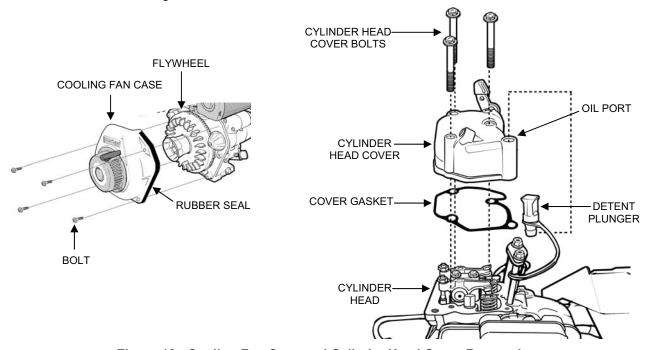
Cooling Fan Case and Cylinder Head Cover Removal.
